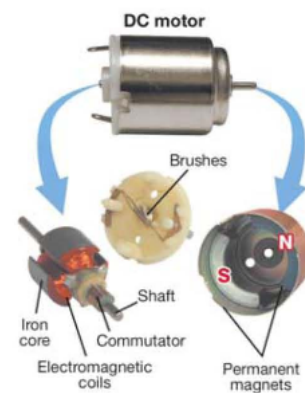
A simple battery-powered motor. Refer to this labeled photograph as you read how the parts work together to make the shaft spin.
